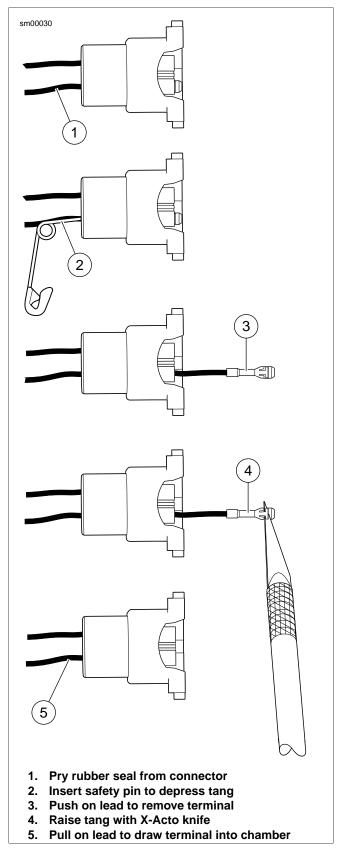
280 Metri-Pack Connector: Remove/Install Socket Terminal
